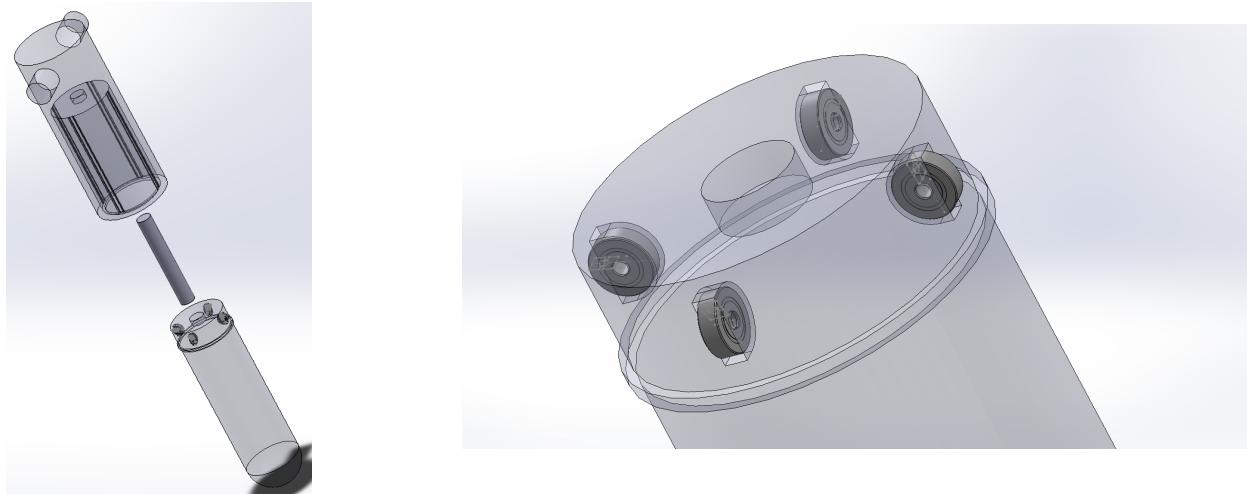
Left: Exploded view of leg. Right: Magnified view of bottom part.
